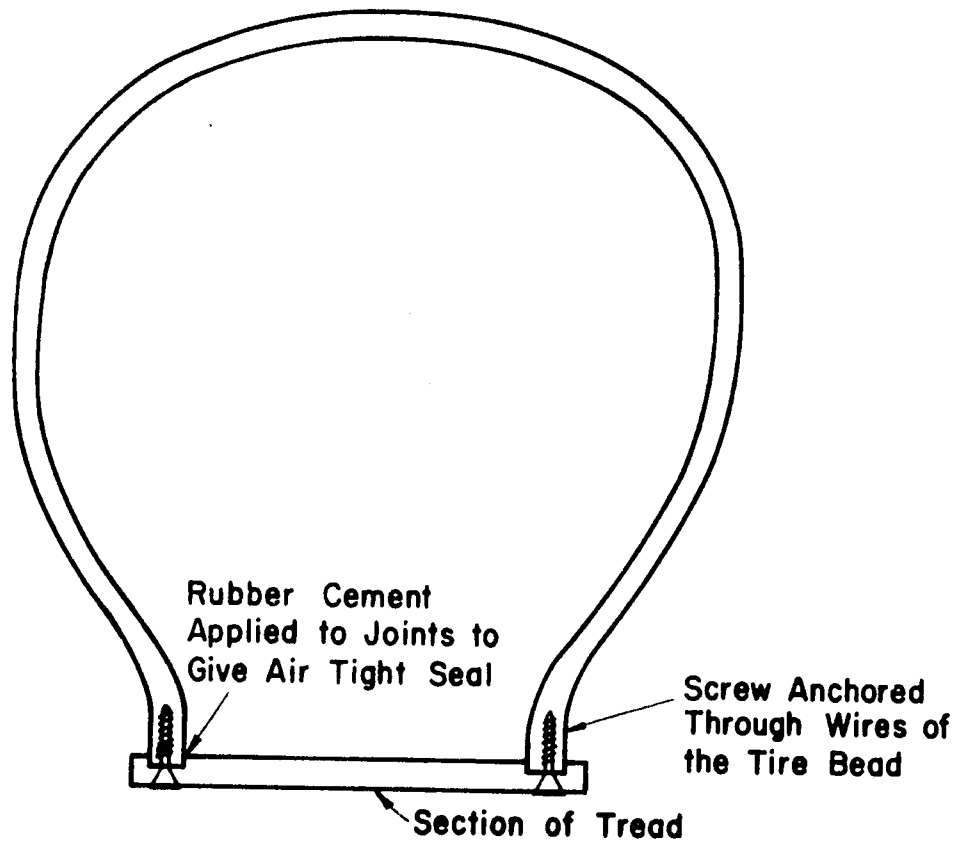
A. Cross Section of Used Tire Siphon Showing Details of Assembly.
